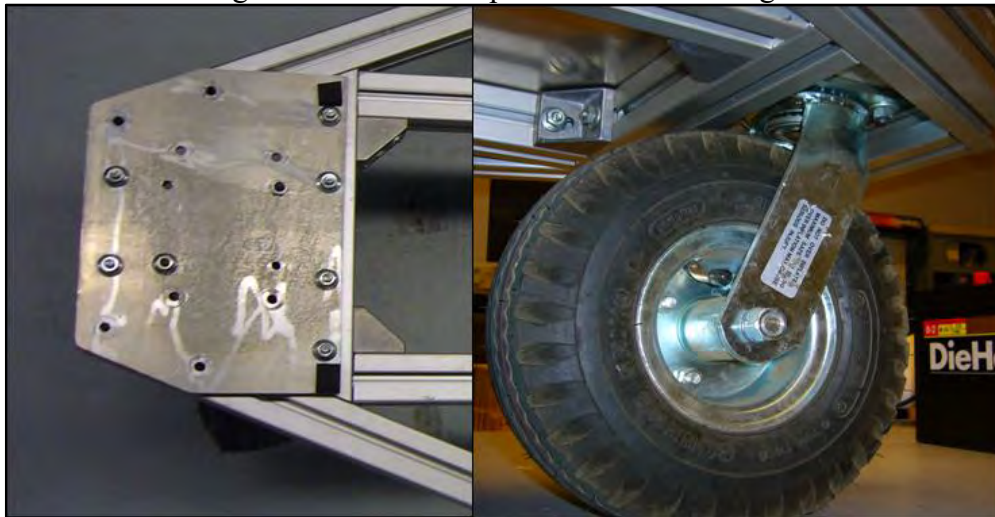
Caster wheel mounting plate (Left), Pneumatic caster wheel (right)
